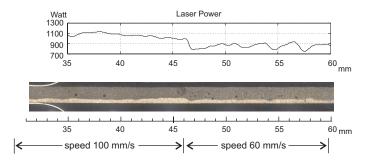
Longitudinal section of a controlled overlap welding experiment and the corresponding laser power.
